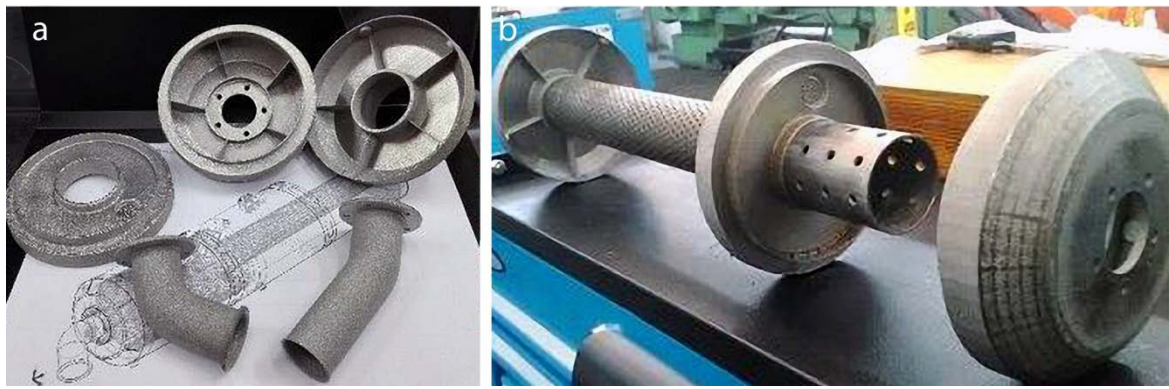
EBM® manufactured parts of exhaust gases system for Formula Technion car
